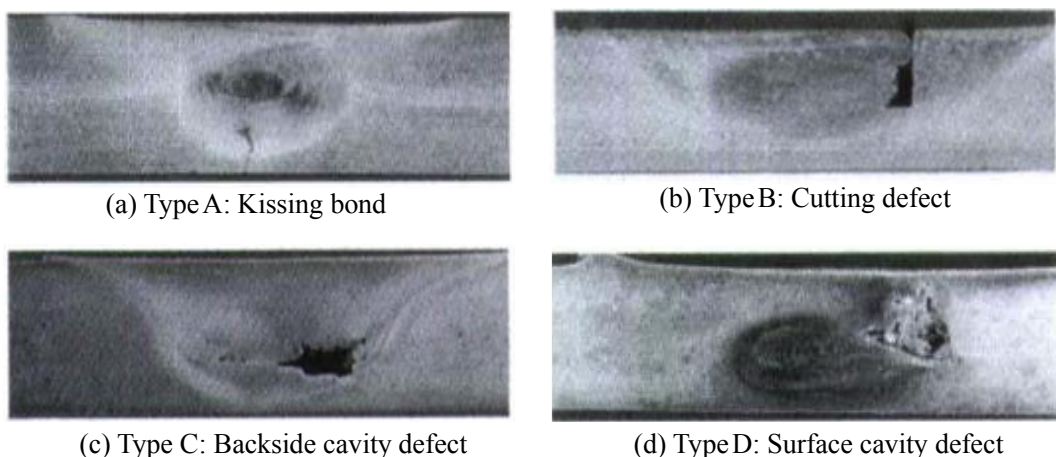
Cross sectional photograph of joining defects in FSW³⁾.
